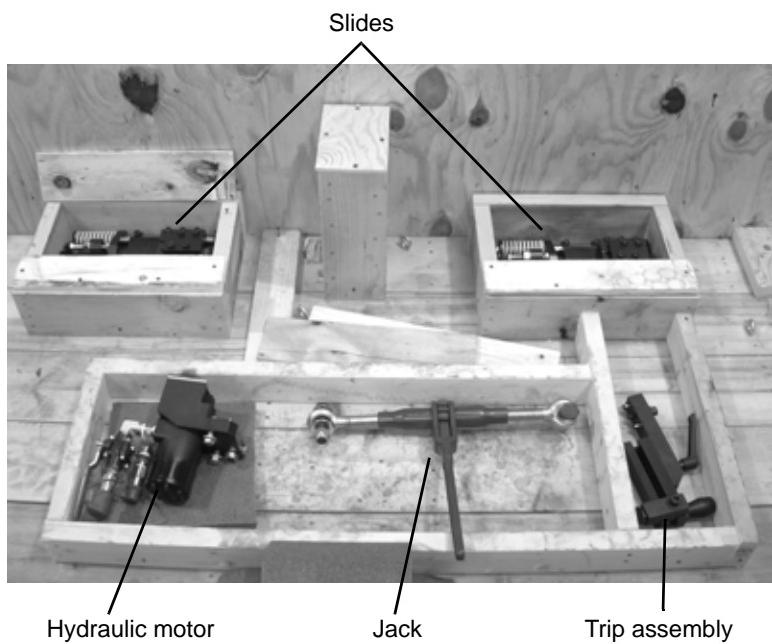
Store the smaller components of the machine in the bottom of the storage case.
